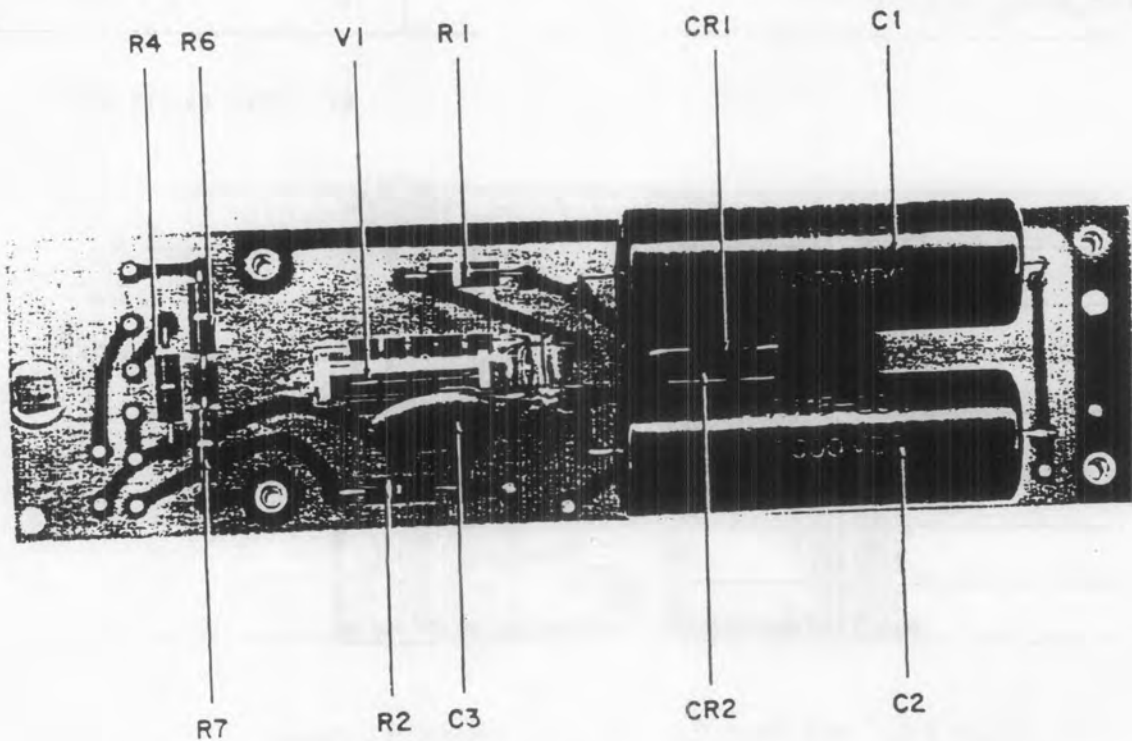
Type 7633 Power Supply Regulator (CRT), Component Locations
